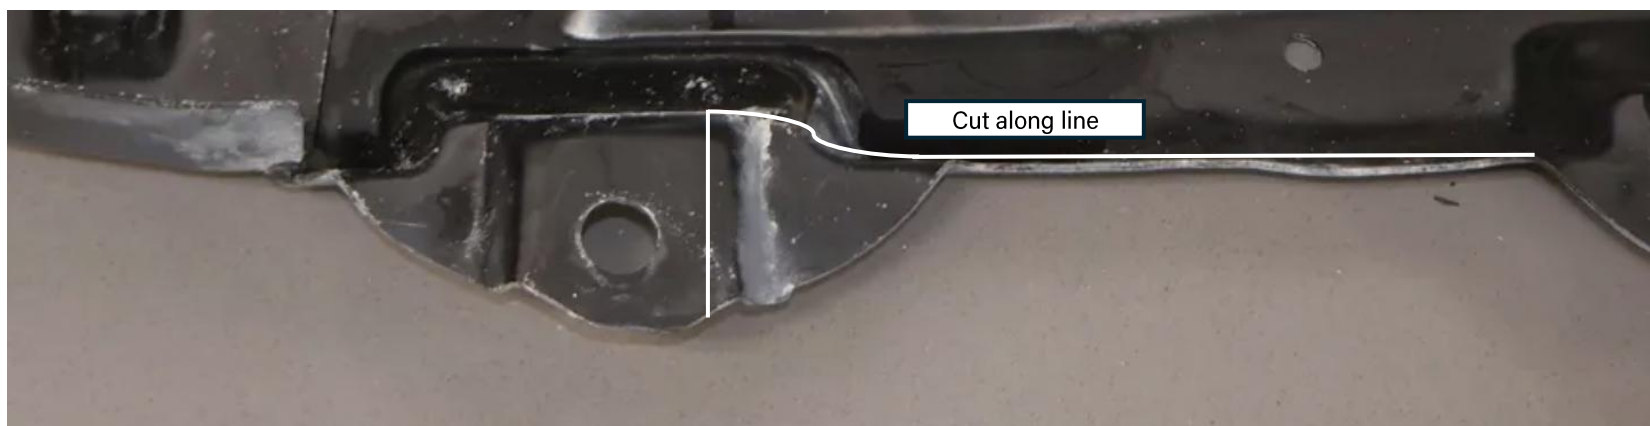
Rear-most gas tank skid plate mount before clearance cut
